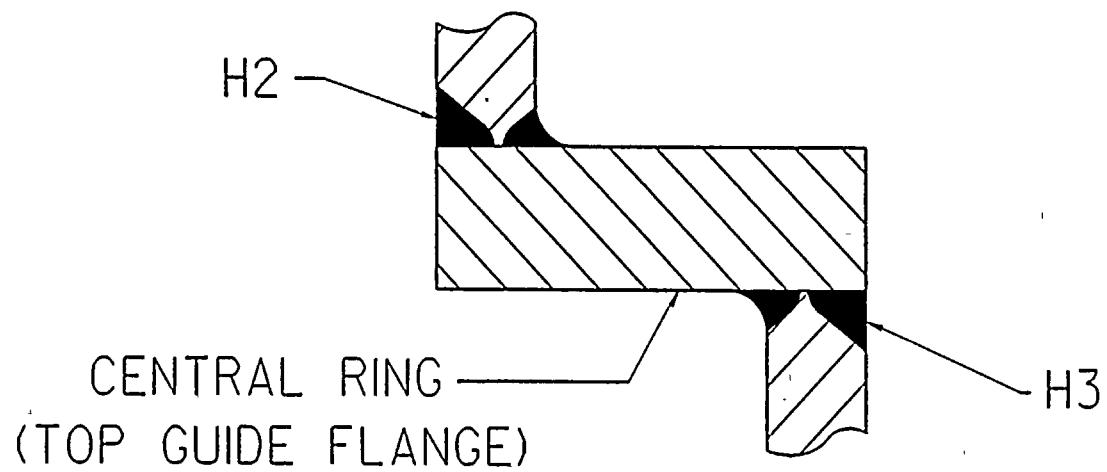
DETAIL TOP GUIDE FLANGE
